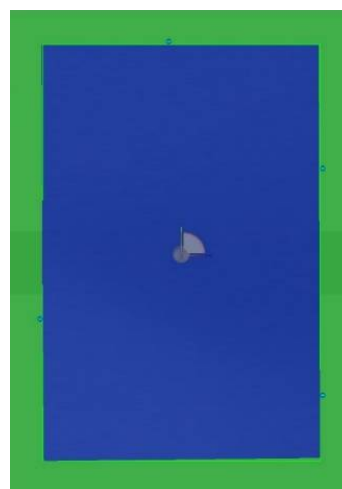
Optimized arrangement of the 4 gauges and proper placement of the blank
